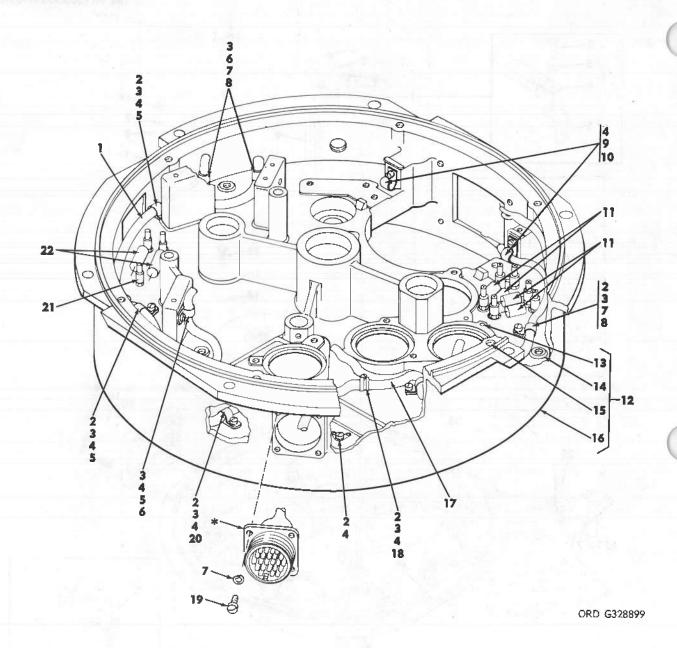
TRANSMITTER, POSITION, GUIDED MISSILE /9007947/-PARTIAL EXPLODED VIEW
